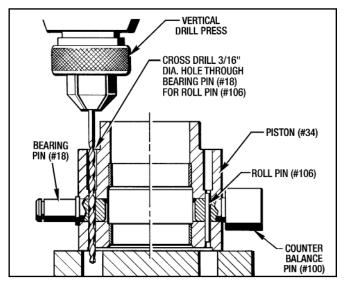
Cross Drilling Piston Bearing Pin (#18)
